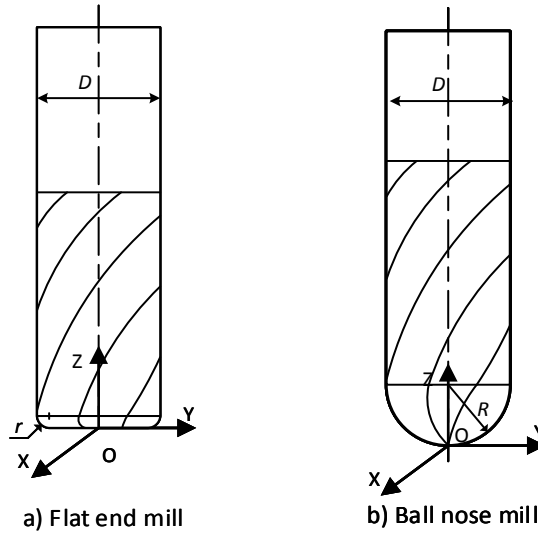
Definition origin of cutter when using mask, a) flat end mill, b) ball nose mill cutter
